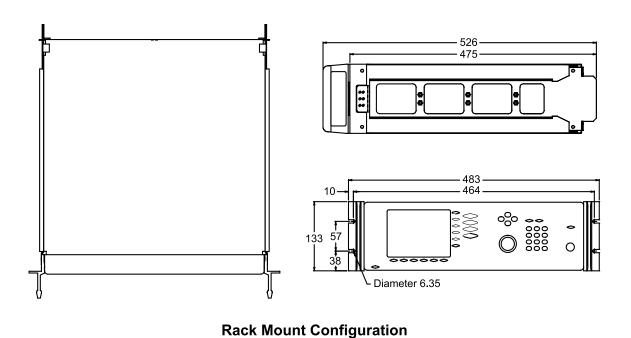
MG369XA Outline Dimensions (in millimeters)
